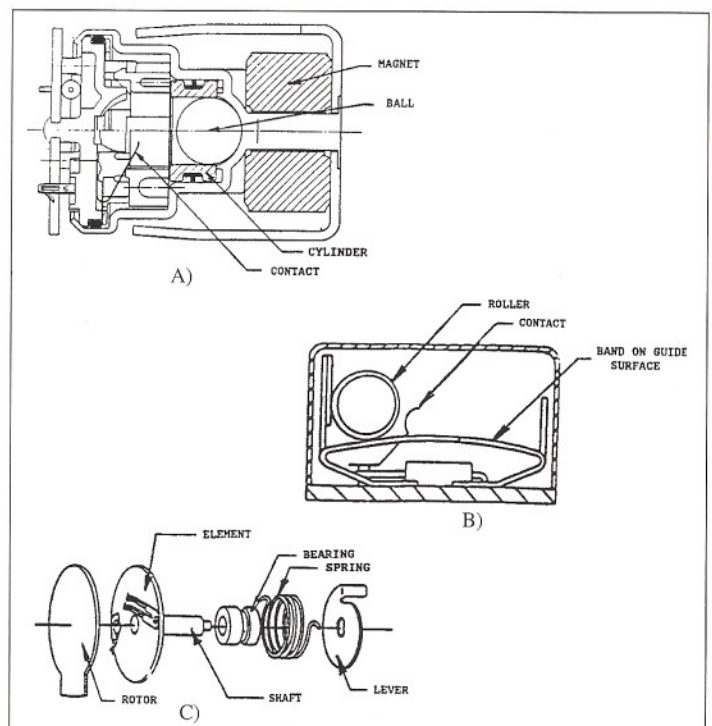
Schematic diagrams of mechanical SIR sensors: A) ball and tube; B) roller band and roller; C) rotary spring and mass.
